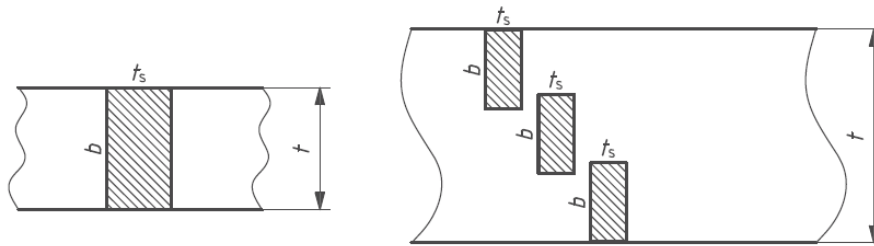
Side bend test specimens for a butt weld (SBB).
